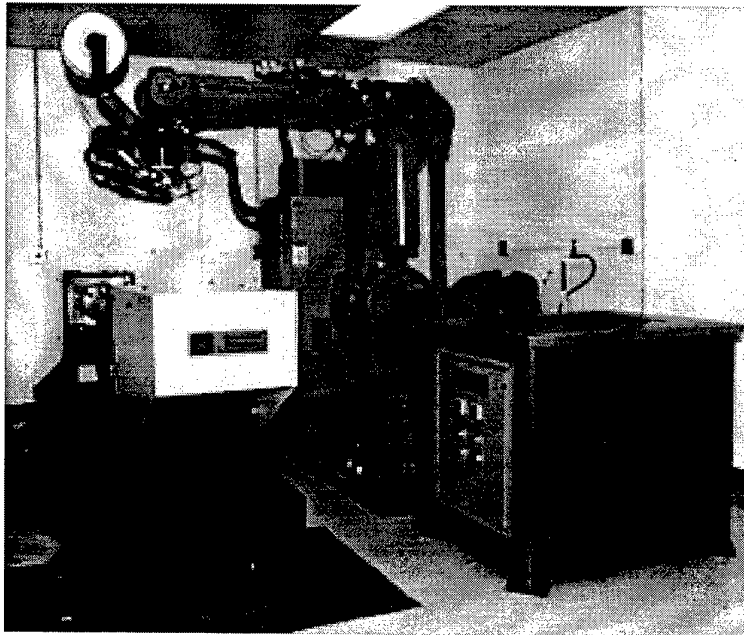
Photograph of NASA Robot, Heated Head and Heated Flat Tool.
